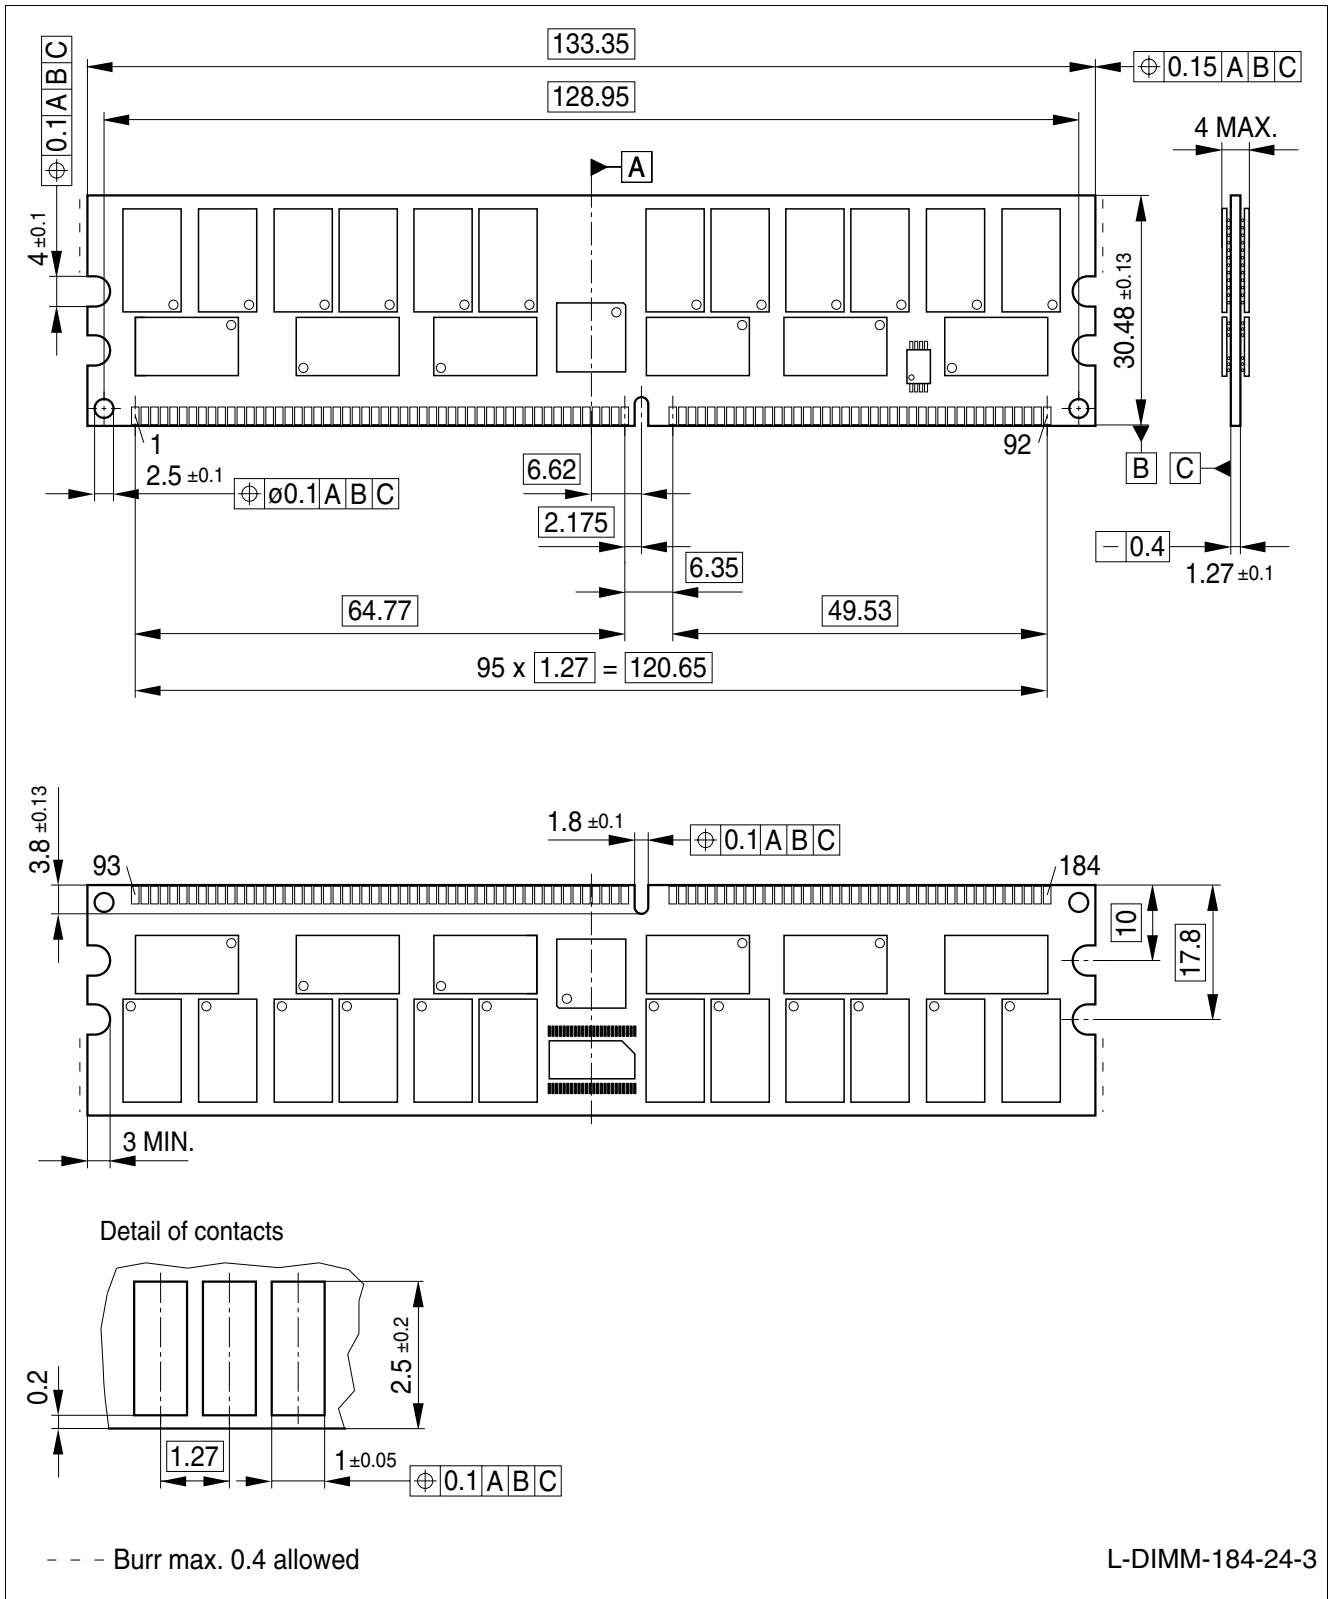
Package Outlines – Raw Card D HYS72D128320GBR-[5/6]-C (2 Ranks x4)
